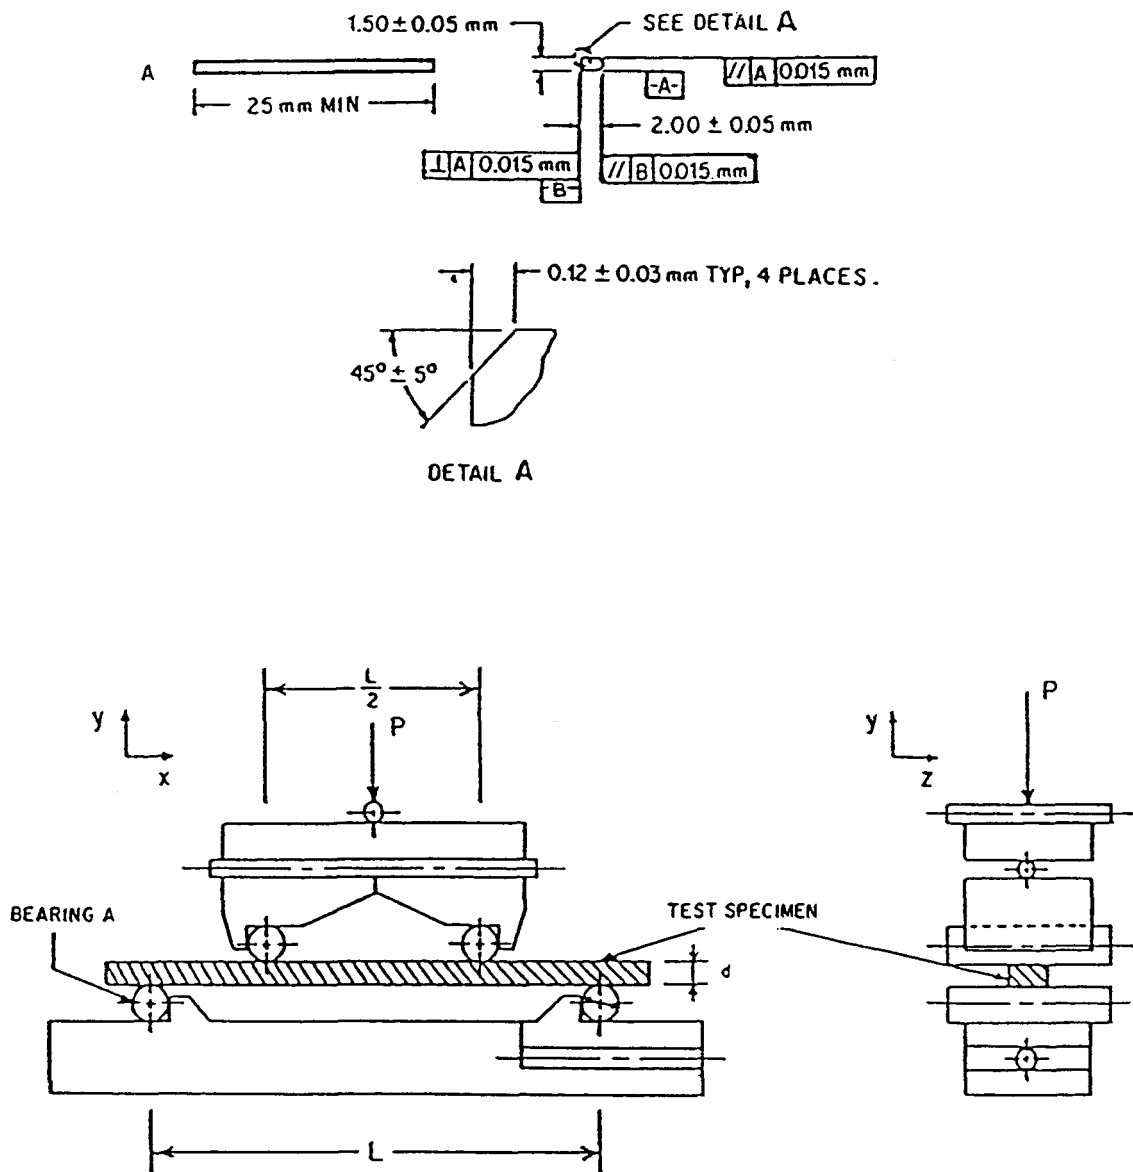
ASTM C1161-90 standard specimen dimensions and rig set-up for a four-point bend test (Bloyce 1990).
